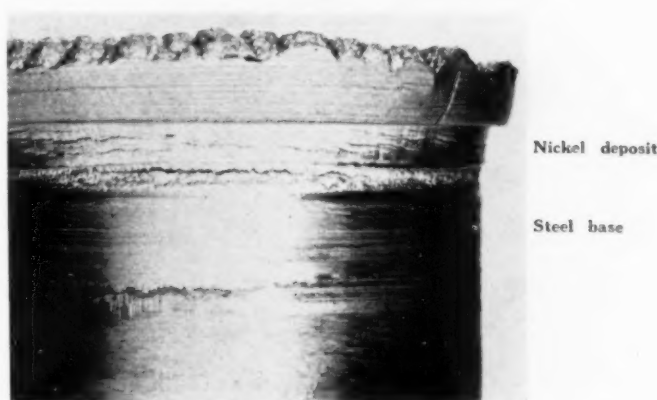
Ollard test piece showing elongated deposit. Mag. $2\frac{3}{4}$ x.
